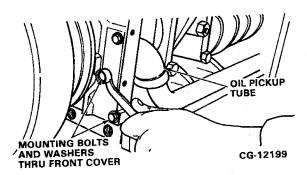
Fasten Oil Pickup Tube to Front Cover
